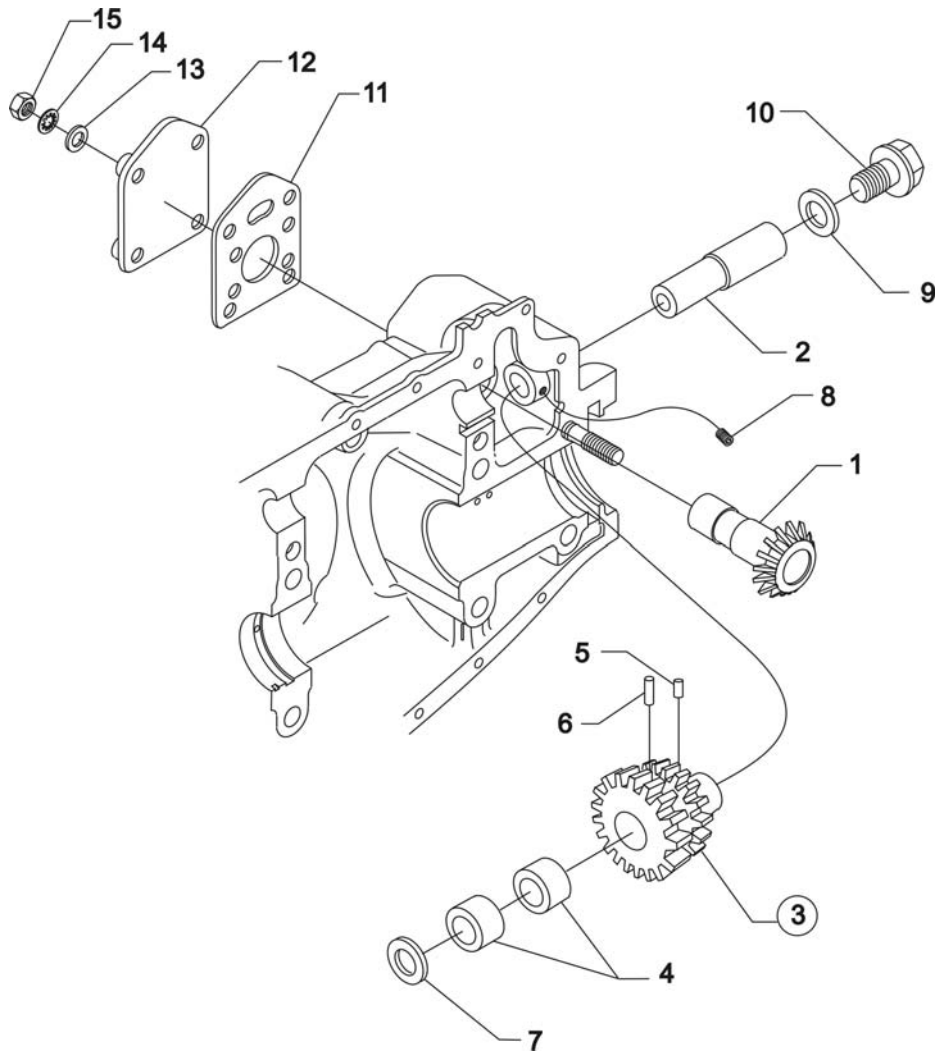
PROPELLER GOVERNOR DRIVE ASSEMBLY
